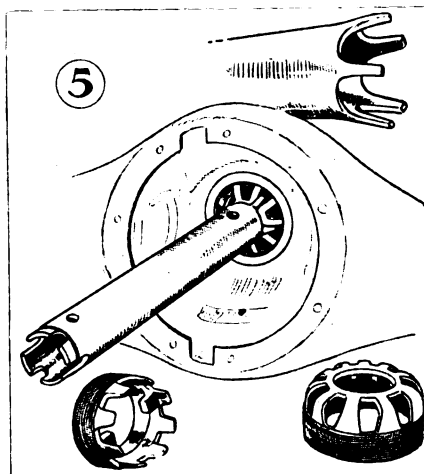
Wrench made from a piece of pipe for removing front bearing adjusting ring carrying bevel pinion bearings
